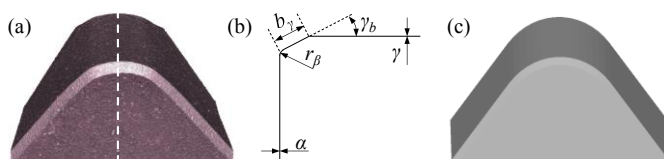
(a) 3D profile of the tool, (b) tool geometry parameters and (c) SolidWorks model of the tool.
